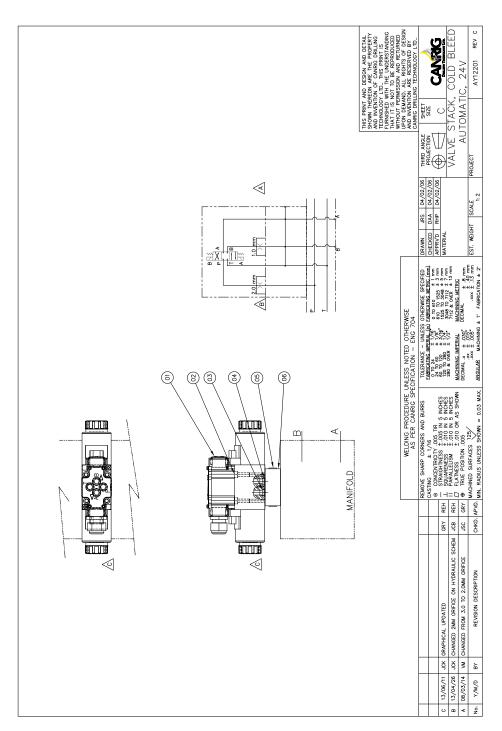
24V Automatic Cold Bleed Valve Stack (Canrig Drawing AY12201C)
